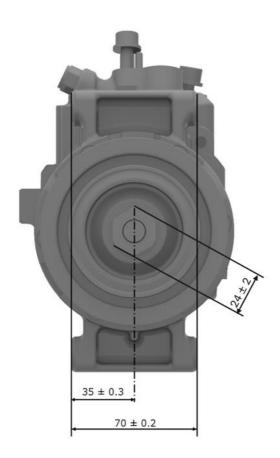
Connection dimensions of air conditioner compressor (front view)
